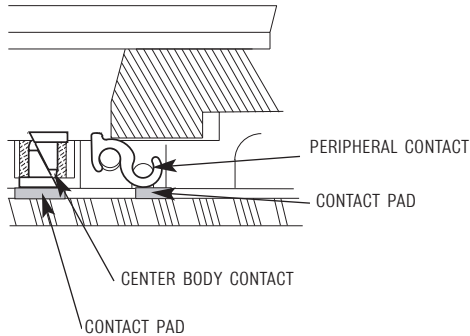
THE ASSEMBLED CENTER BODY CONTACT.
